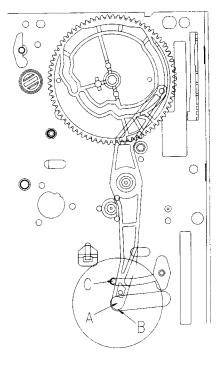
DATUM POSITION OF RELAY LEVER & CAM GEAR
